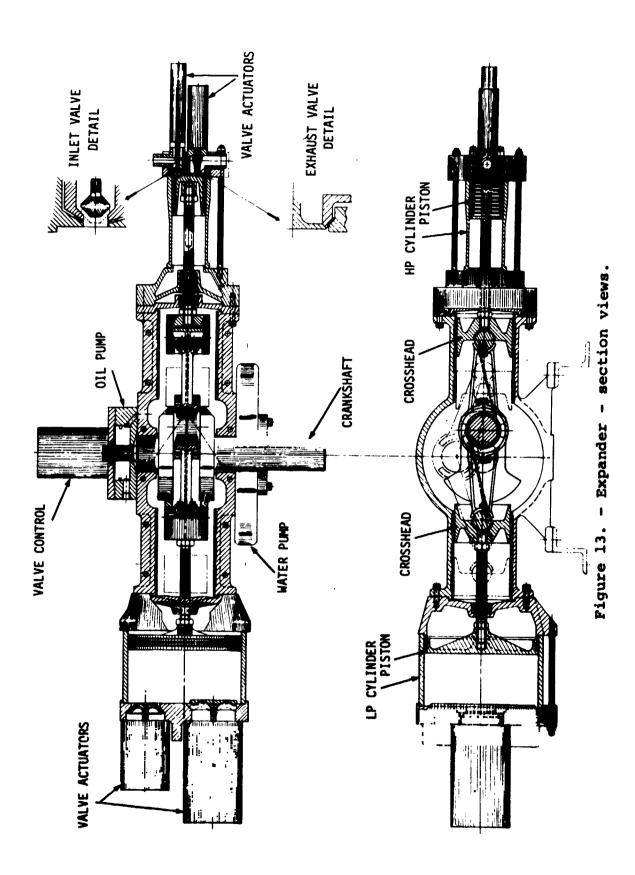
is a section view of the expander cylinders and crankcase. The layout and construction of the crankcase is nearly identical to internal combustion (I.C.) engine practice. Because steam pressure and piston area determine the piston and crank loads, the design stresses can be determined by the designer unlike a diesel or gasoline engine where cylinder pressures are required at certain levels to allow the cycle to function. The design stress levels in a steam engine would be similar to those of a diesel. Steam engine shock loads are lower than in I.C. engines due to the absence of diesel knock or gasoline engine detonation. This would allow low cost components (the crankshaft and connecting rods can be made of cast iron).
